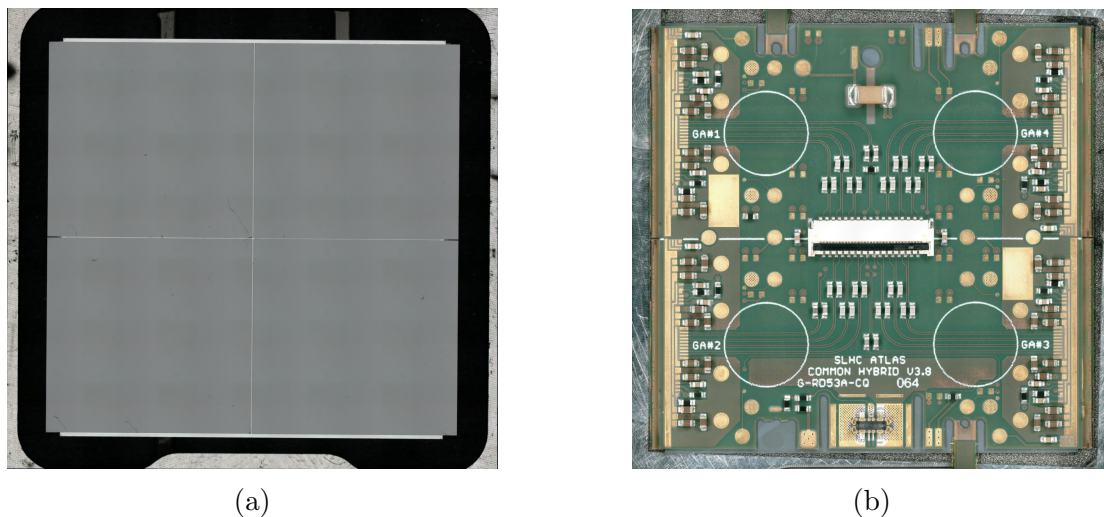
Details of the RD53A quad module. Figure a) shows the bottom side of the bare module with four readout chips, while b) shows the assembled quad module.
